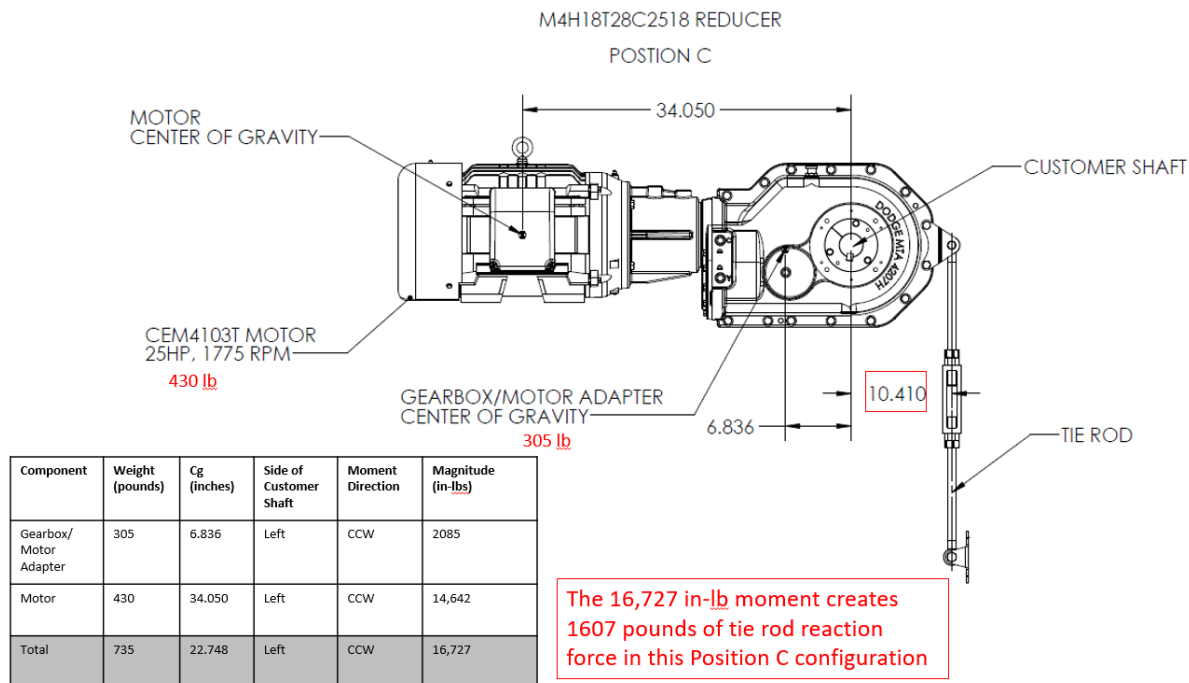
Motor and Gearbox Weights in Positon C (No Power Applied)
